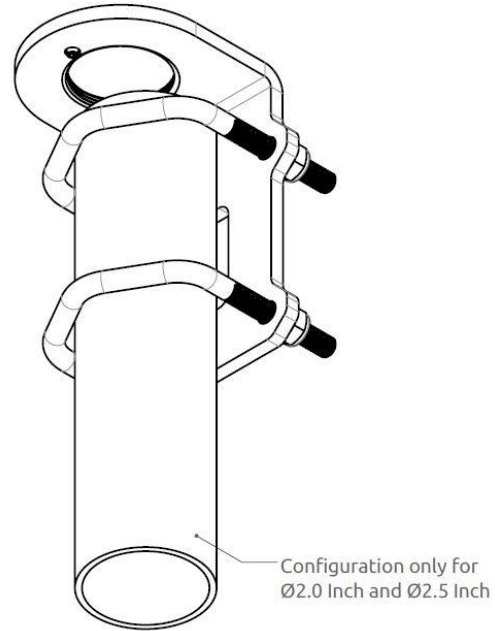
Bracket Mount (1.5" to 2.5" tube), Antenna Unit – vertical tube mount.
